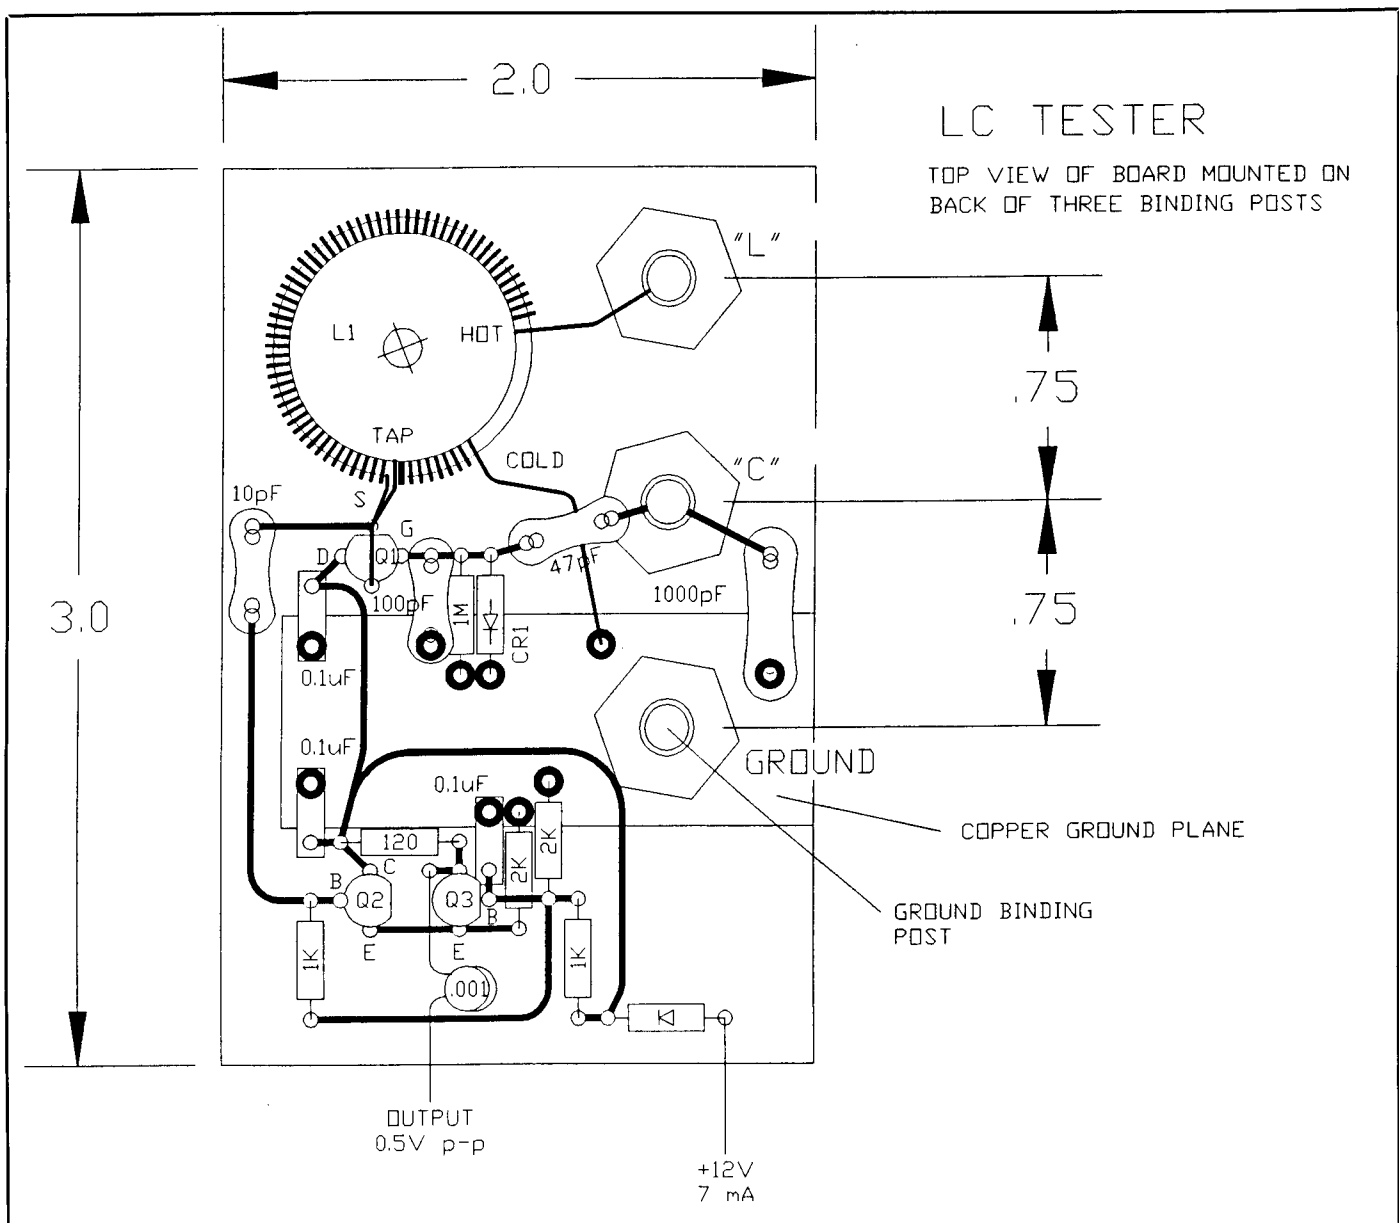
The oscillator and buffer layout on a 2 by 3 inch piece of perforated copperclad board.
